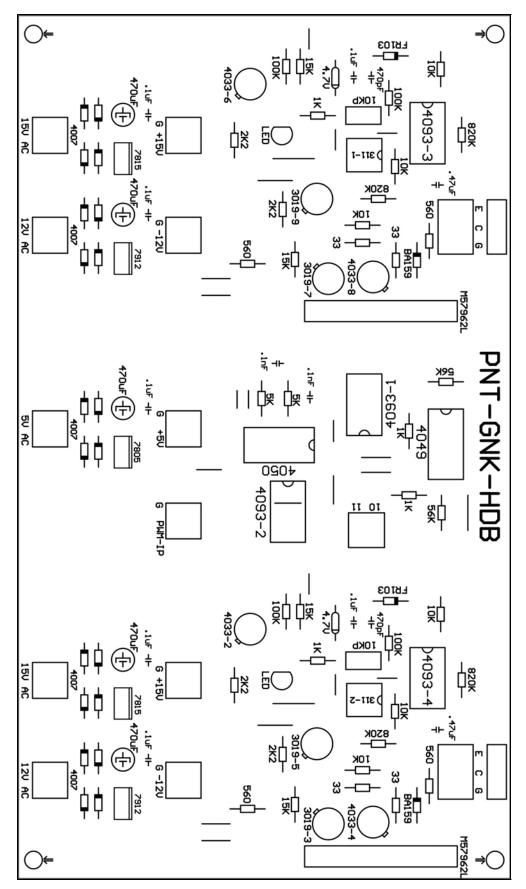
Silk screen layer of the gate driver circuit with dead band and protection circuit and jumper details
